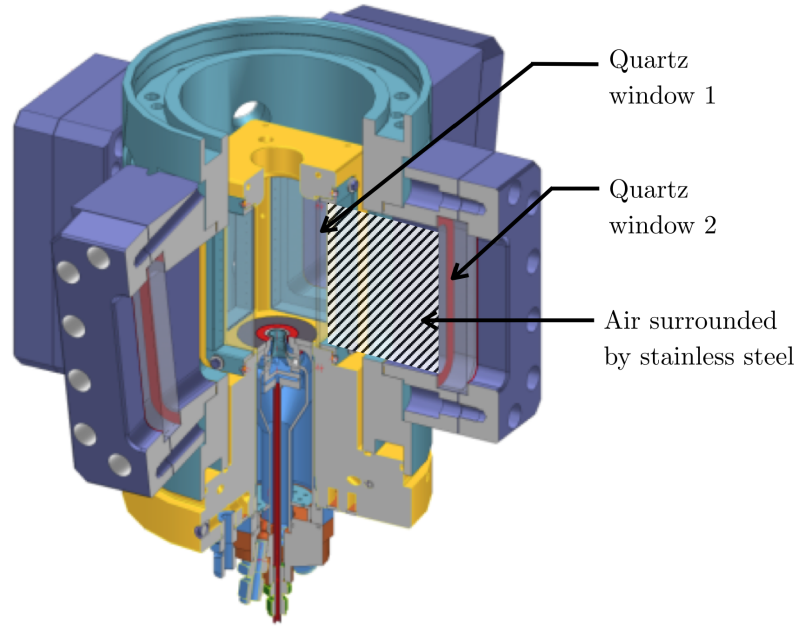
Design of burner, combustion chamber and optical module of pressure housing.
